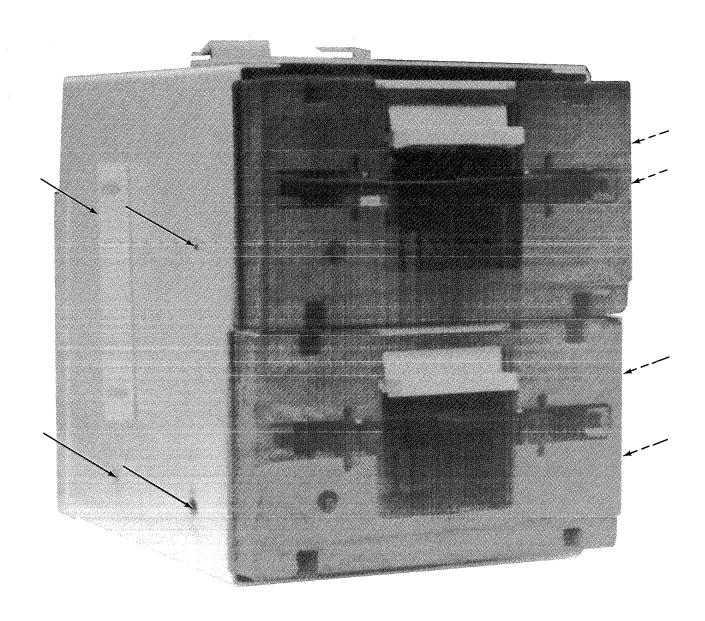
Mini Drive Mount Screw Locations on Shield Box
